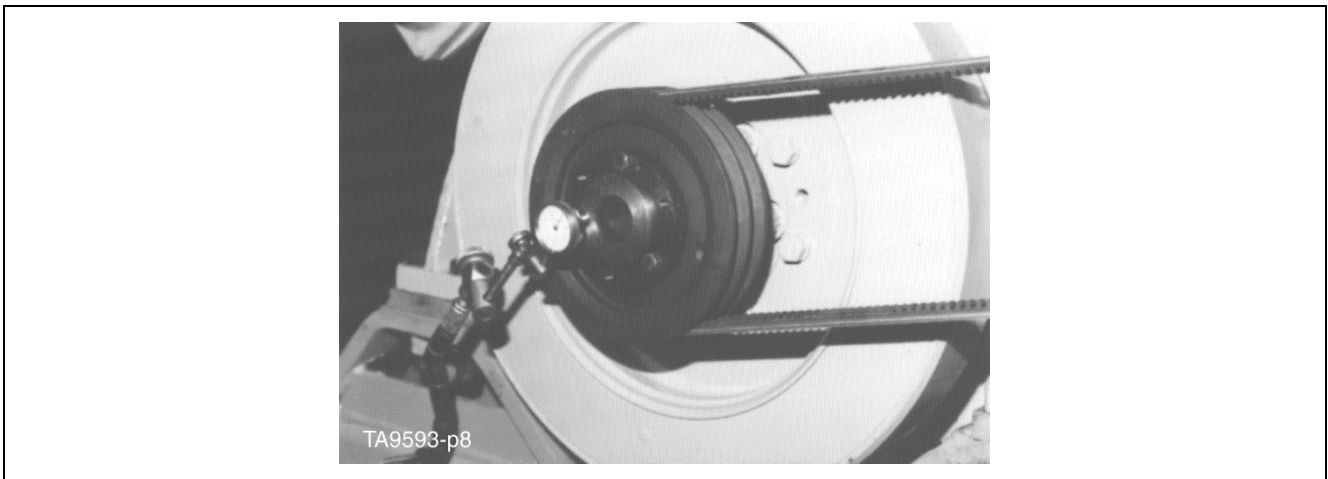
Measurement of Axial Runout of Engine Flexplate Mating Surface
